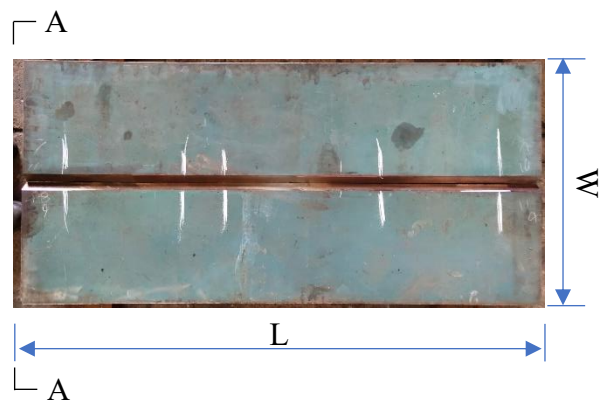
Butt-welded sections with an X-shaped groove
